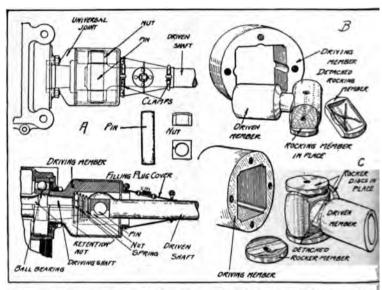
Construction of the Sliding Block Pattern Universal Join
